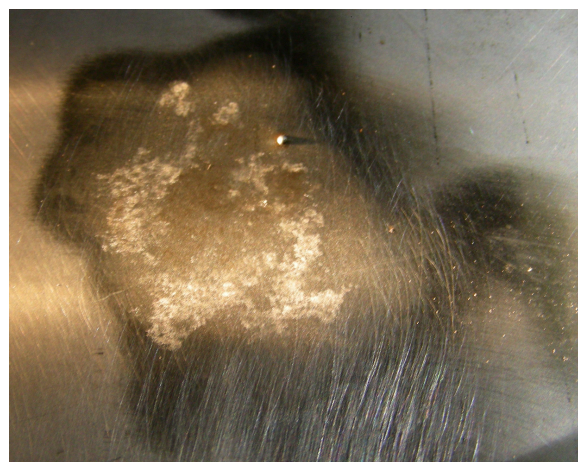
LE1 drum inner surface behind bar code plate attachment weld after cleaning.
